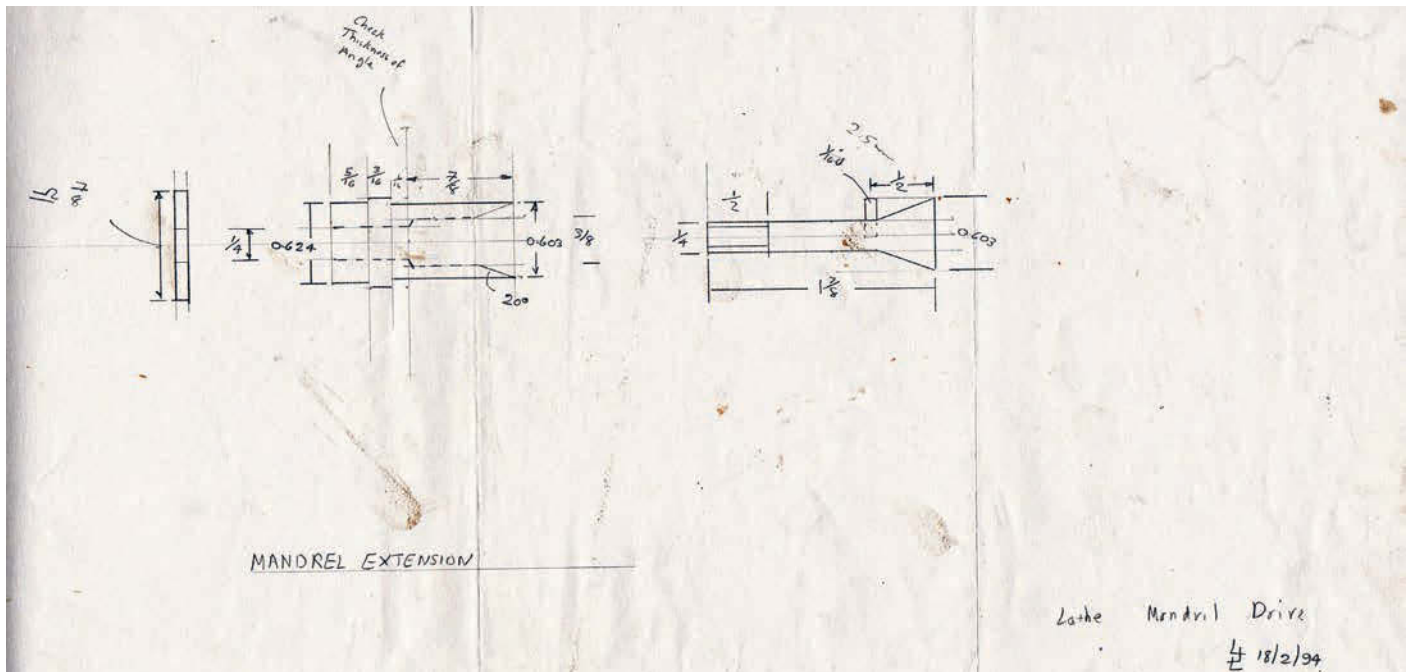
Laurie's 1994 drawing for the mandrel extension.
